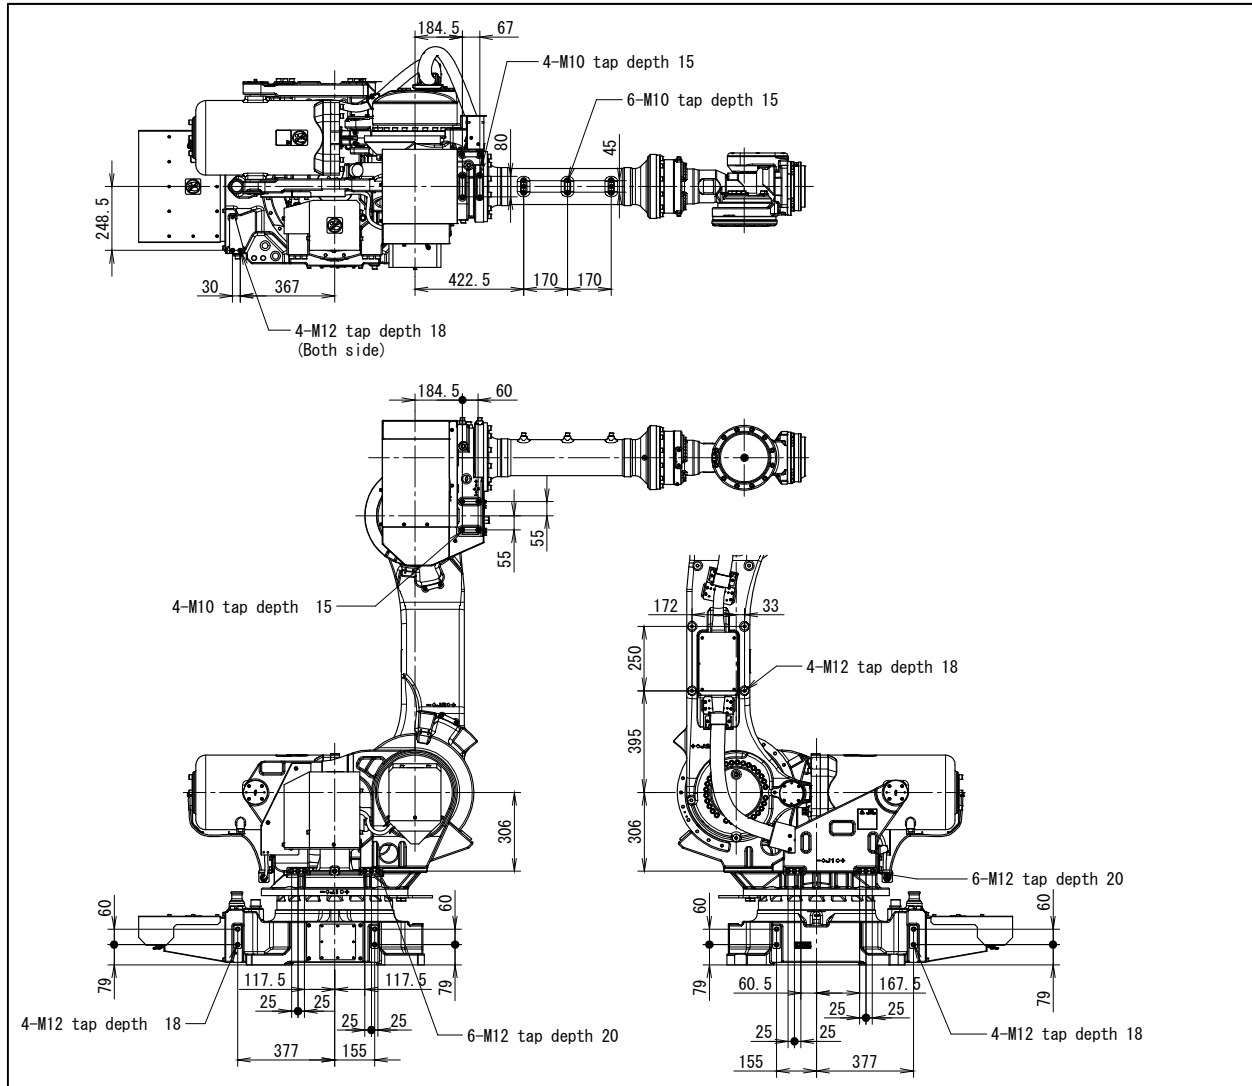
(f) Equipment mounting faces (R-2000iB/210WE)
